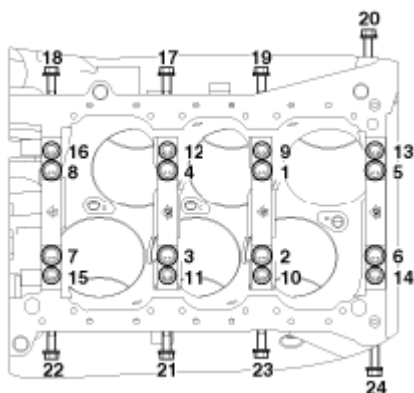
Identifying Torque Sequence Of Main Bearing Cap Bolts
